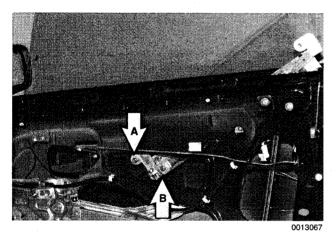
To remove rear window limit stop bracket, remove bolt A and loosen clamping bolt B.
